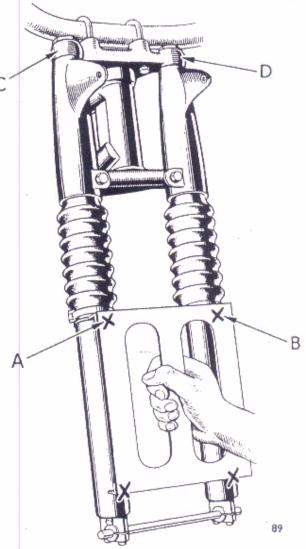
Checking the telescopic fork leg alignment with service tool Z103
